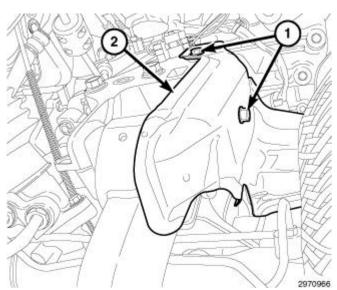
Rear Engine Mount Heat Shield & Bolts Courtesy of CHRYSLER GROUP, LLC
